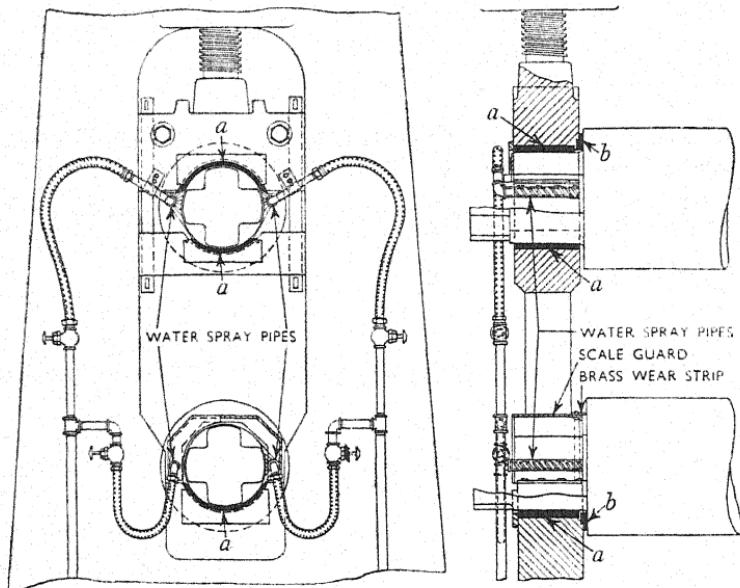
Outline of Mounting for Phenolic Plastic Bearings with Water Lubrication
